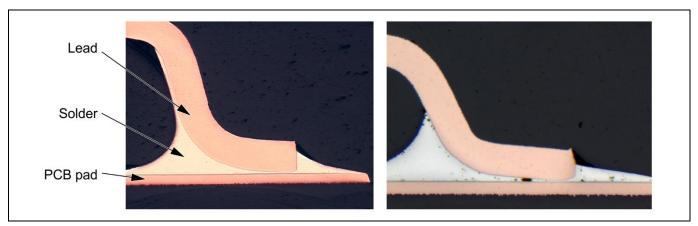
Soldered gullwing leads with post-mold plated Sn (left) and with pre-plated Ni/Pd/Au (right).
